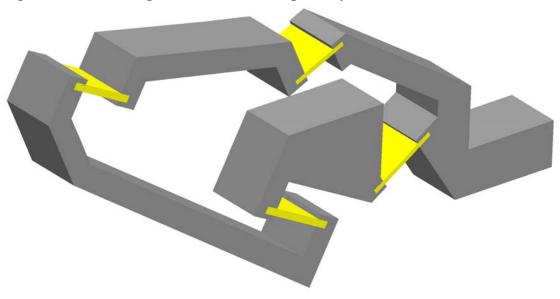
Exploded Assembly Drawing of Full Scale Compliant Synchronized Recline
